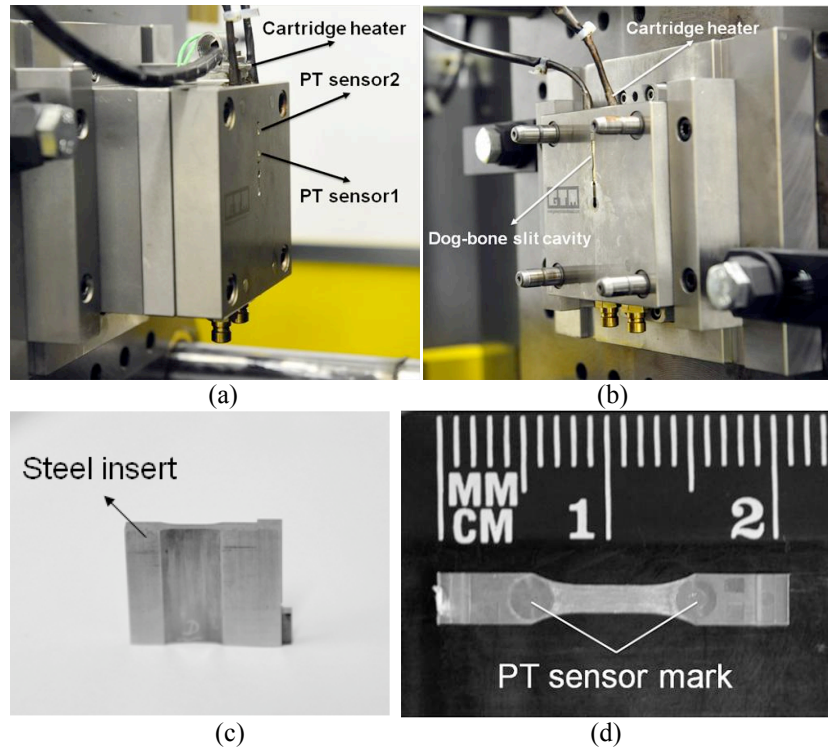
Mold and measurement system: (a) stationary half, (b) moving half, (c) steel mold insert, (d) molded part.
